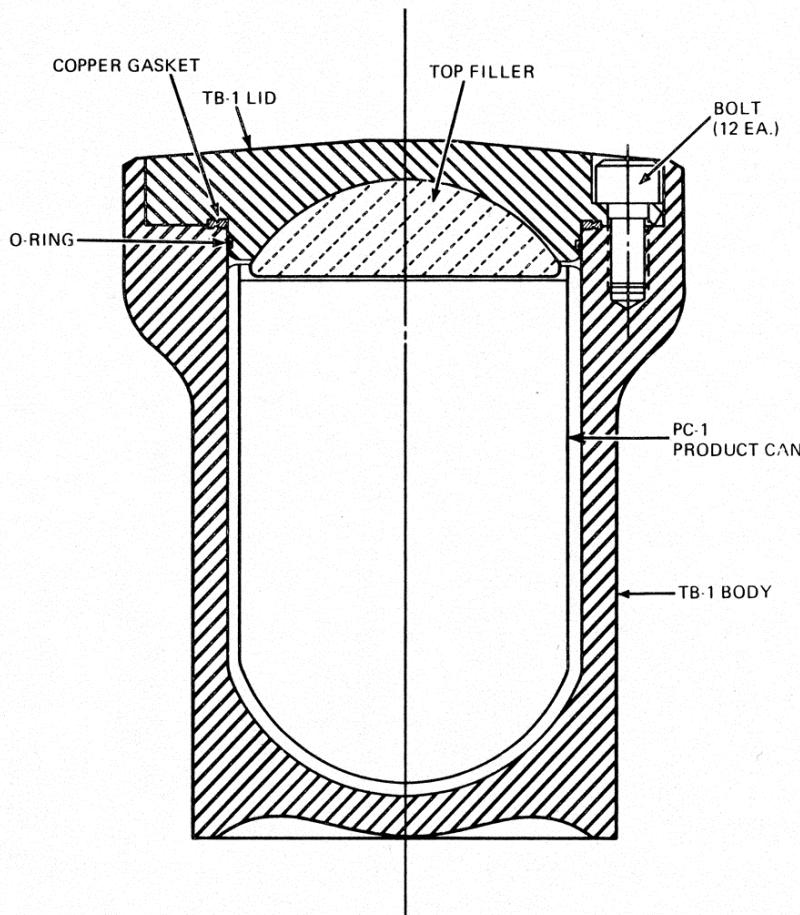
Cutaway Drawing of TB-1 Containment Vessel
